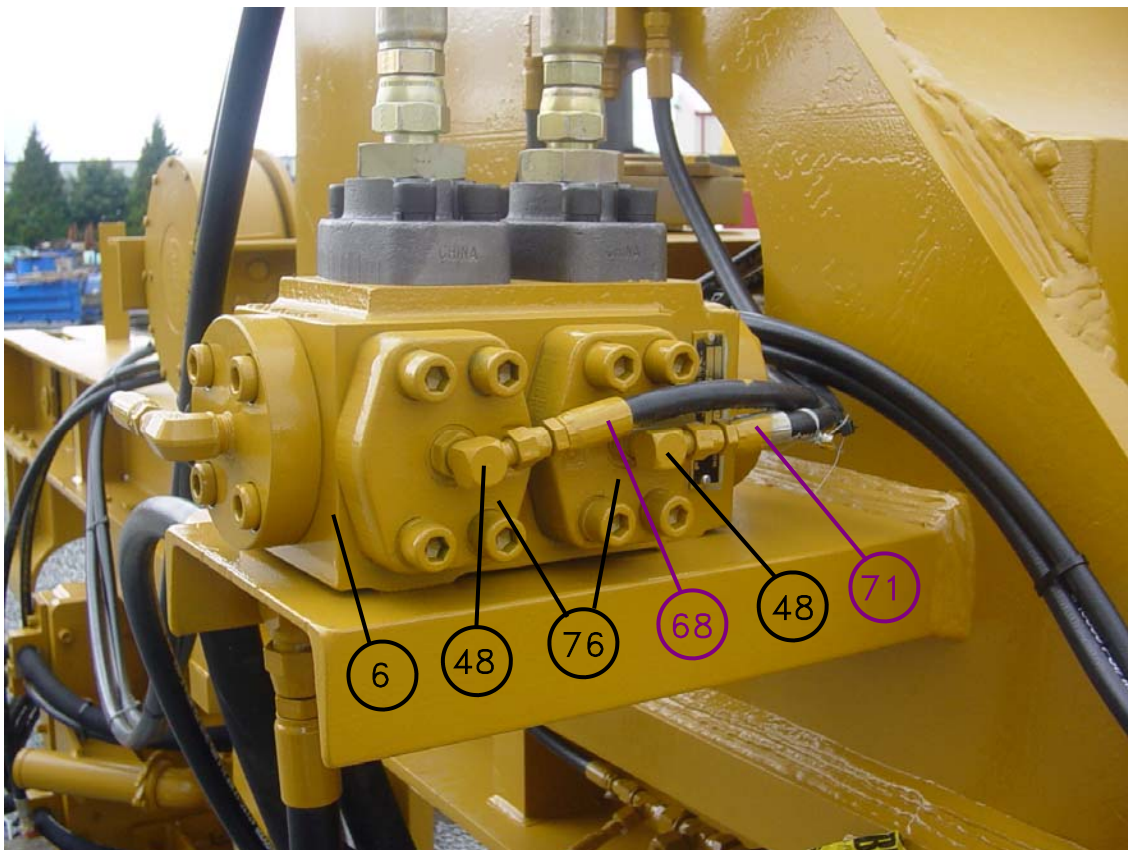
RIGHT-HAND SIDE SHOWING FERROY VALVE
